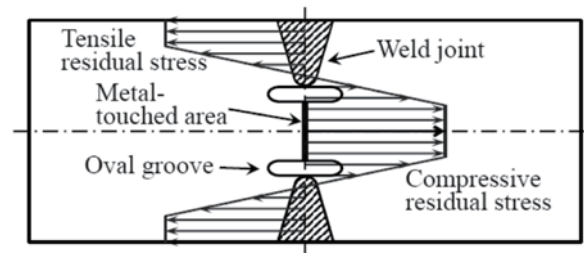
Configuration of thick plate butt weld joint and residual stress distribution.
